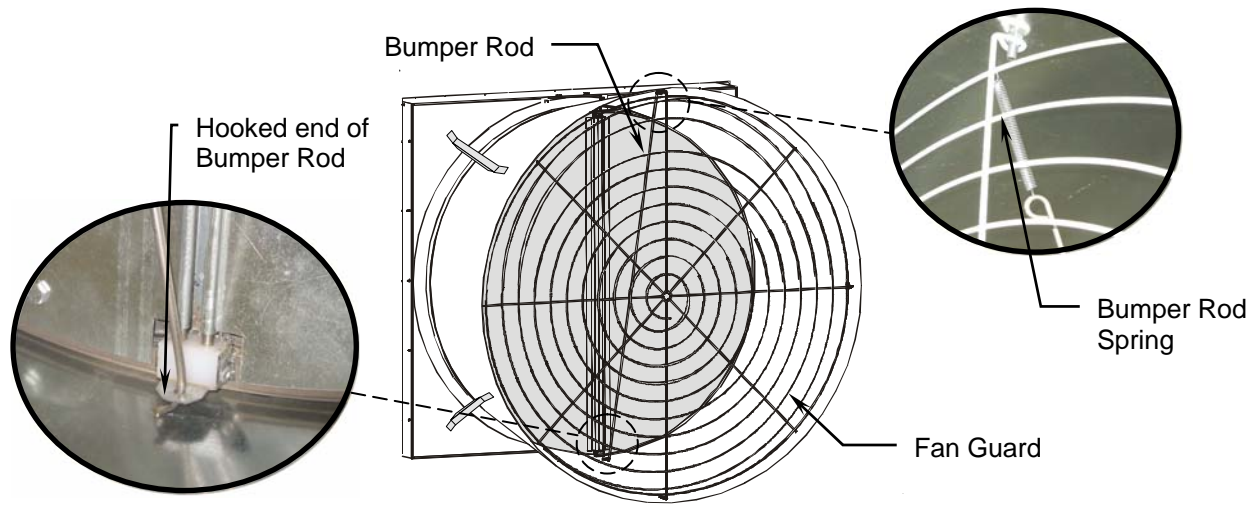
Fan Guard and Bumper Rod for 36" Fan
